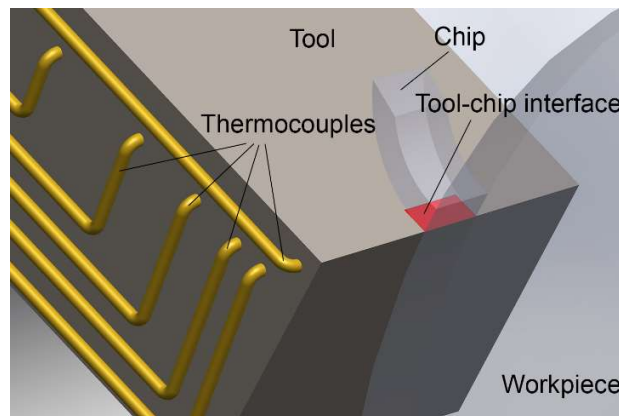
Schematic of tool–workpiece interaction including tool–chip interface and embedded thermocouples.
